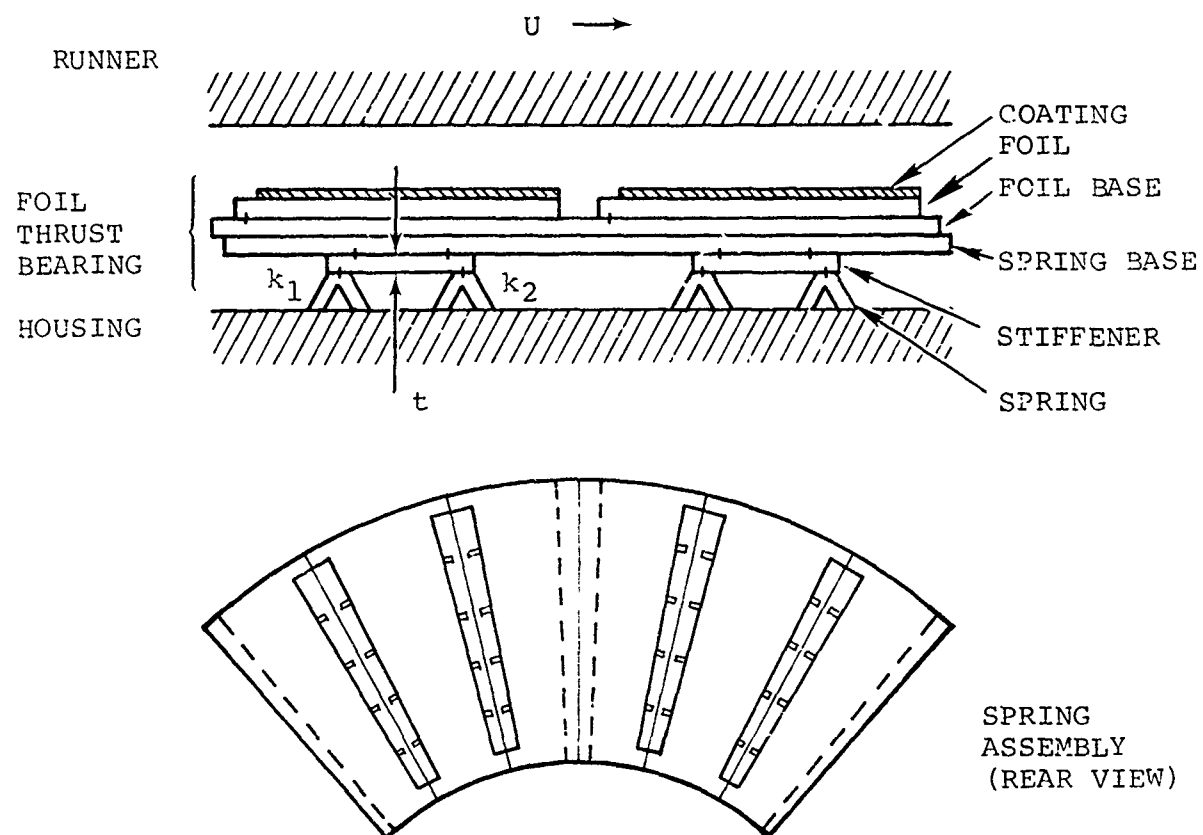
Dual Spring Foil Thrust Bearing Schematic.
